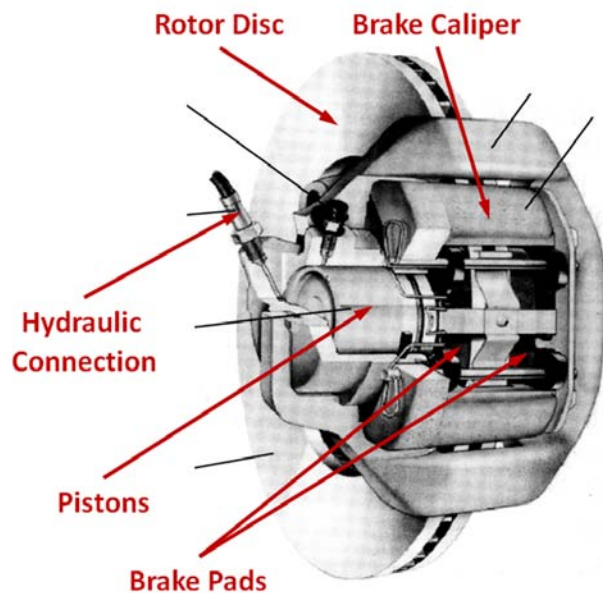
Floating Disc-Caliper Brake Assembly [3]
